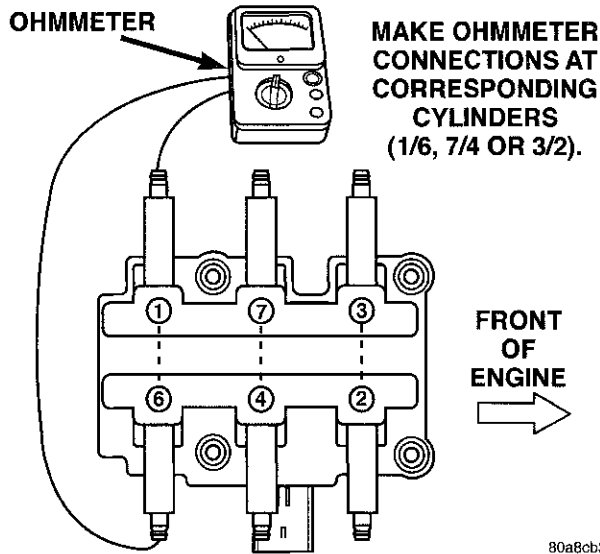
Checking Coil Secondary Resistance—Front Coils—8.0L V-10 Engine
